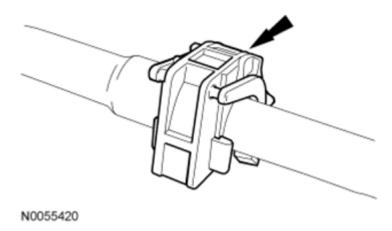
Locating Hose Courtesy of FORD MOTOR CO.
